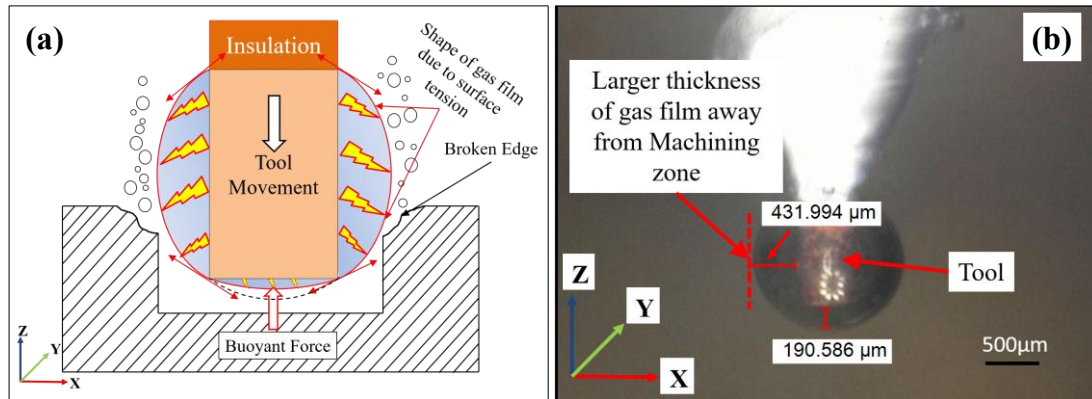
6 Shape of gas film due to surface tension and buoyant force for existing tool feeding technique (a) Schematic View and (b) Photographic view
